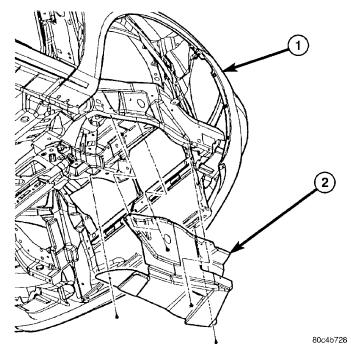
FRONT SIDE RAIL ACCESS PULLEY SPLASH SHIELD
